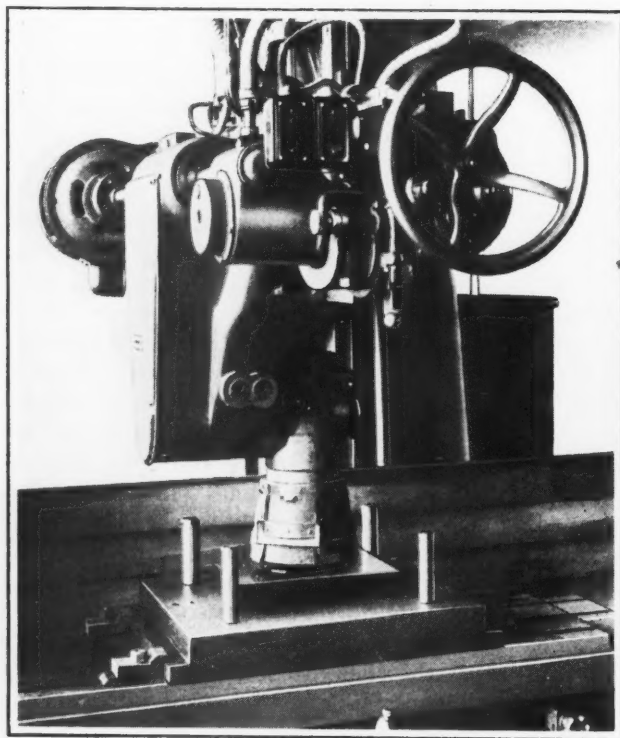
Grinding Wheel Head which can be Tipped for Grinding Dies Close to Guide Pins
